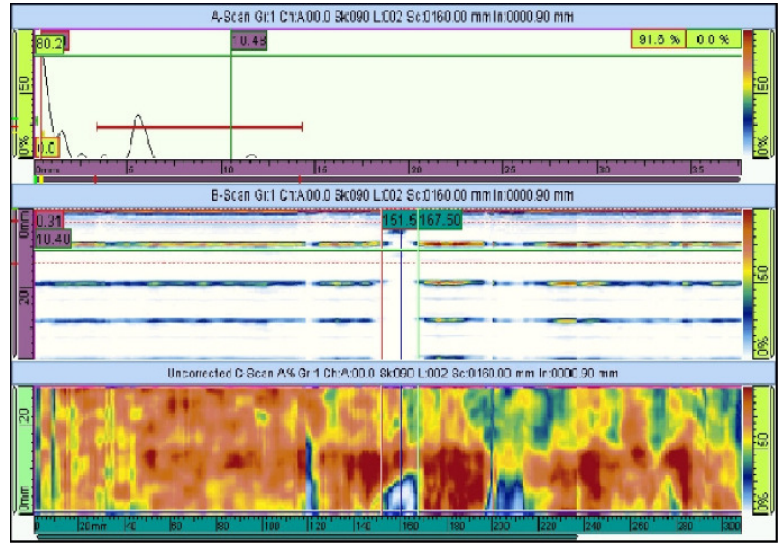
Single Pit with sharp thinning Wall Loss %: 42 %, Defect Length: 16mm
